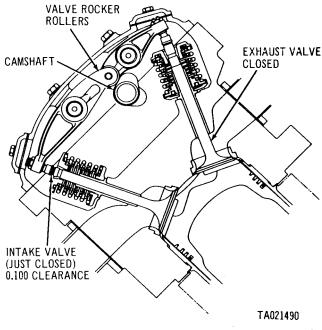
Cross section of cylinder 6R showing position of camshaft lobes for valve timing.
